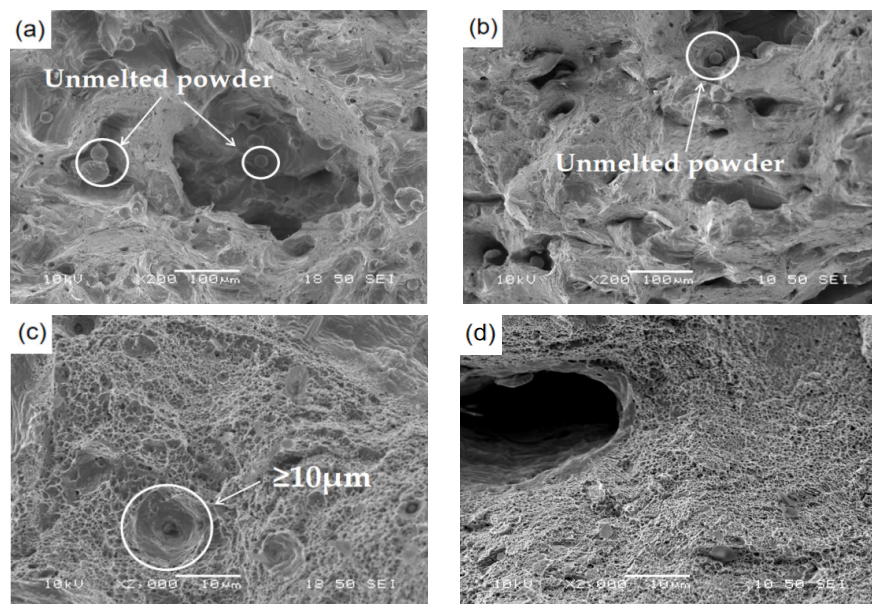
Surface topography before stretching: (a) flat-printed sample 200×; (b) vertical-printed sample 200×; (c) flat-printed sample 1000×; (d) vertical-printed sample 1000×.
